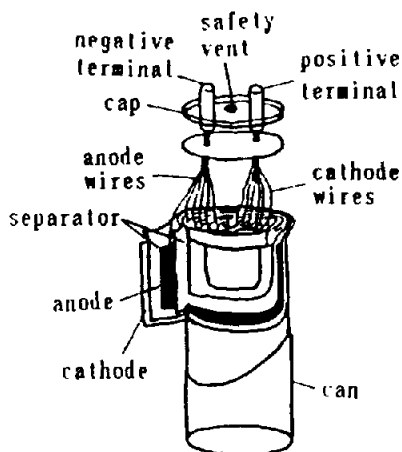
Exploded view of a cylindrical 'D'-size Li/PAn battery.
